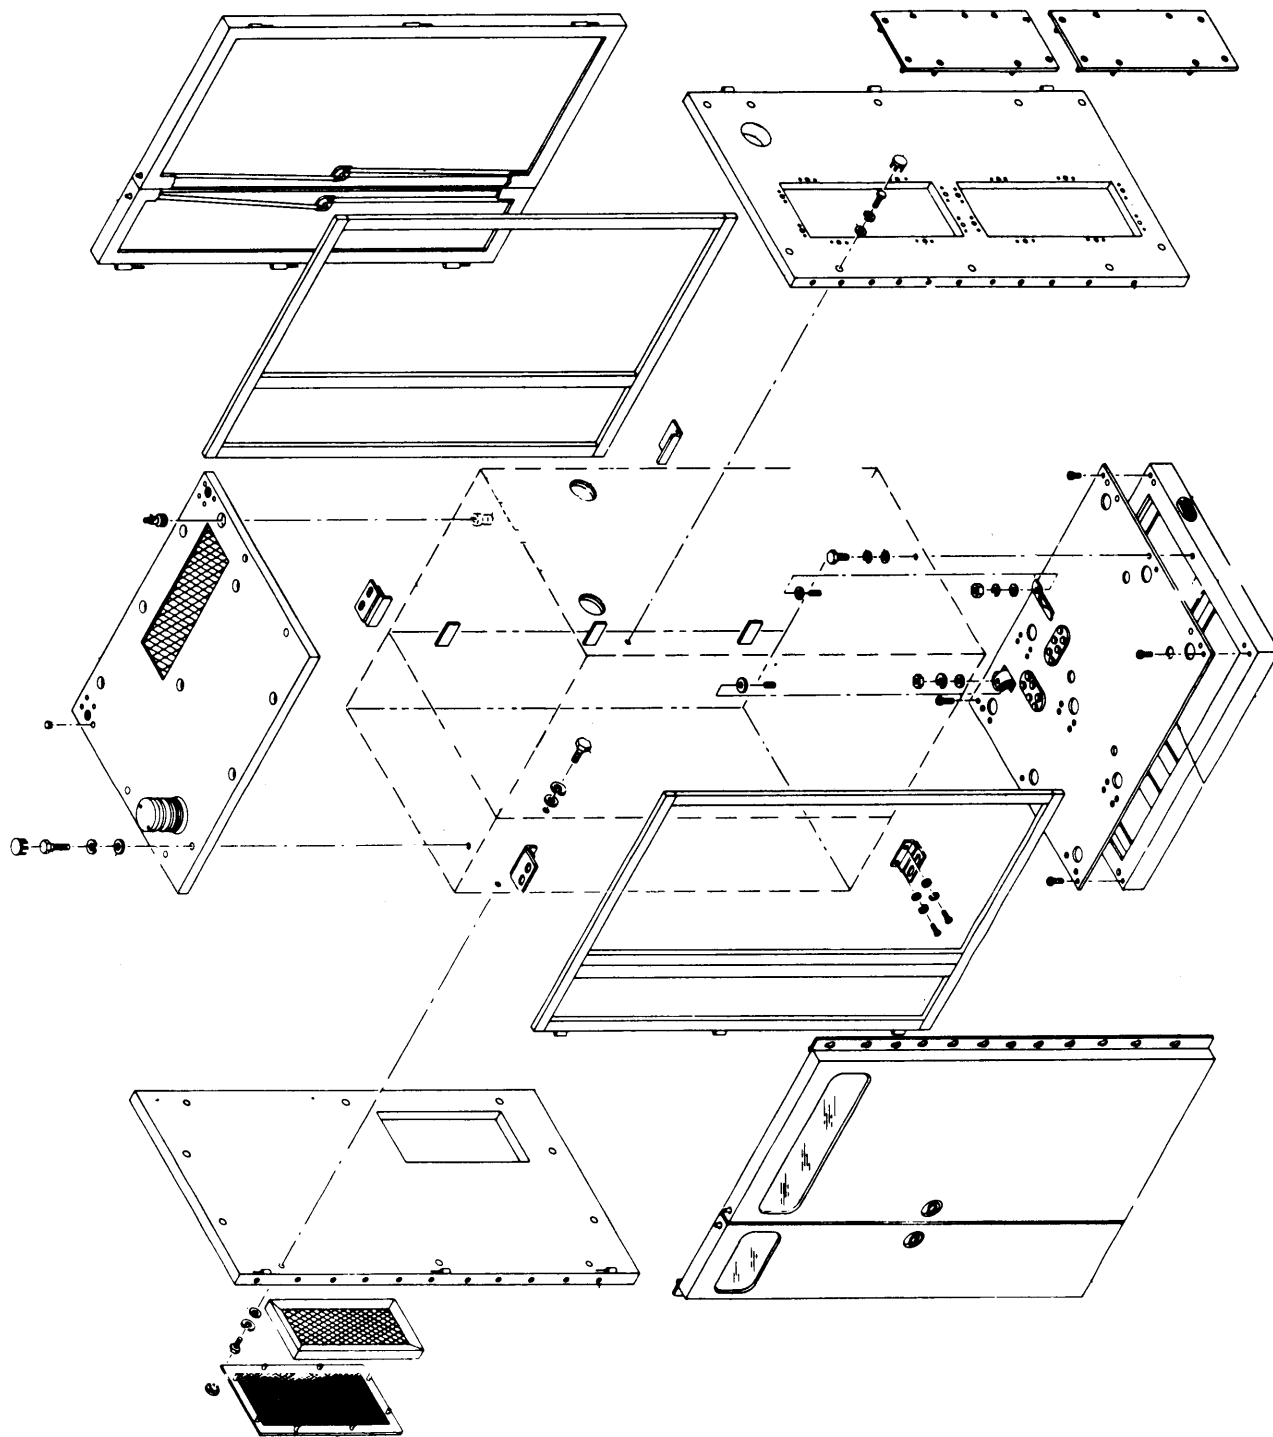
Exterior Covers and Trim, Installation Diagram
